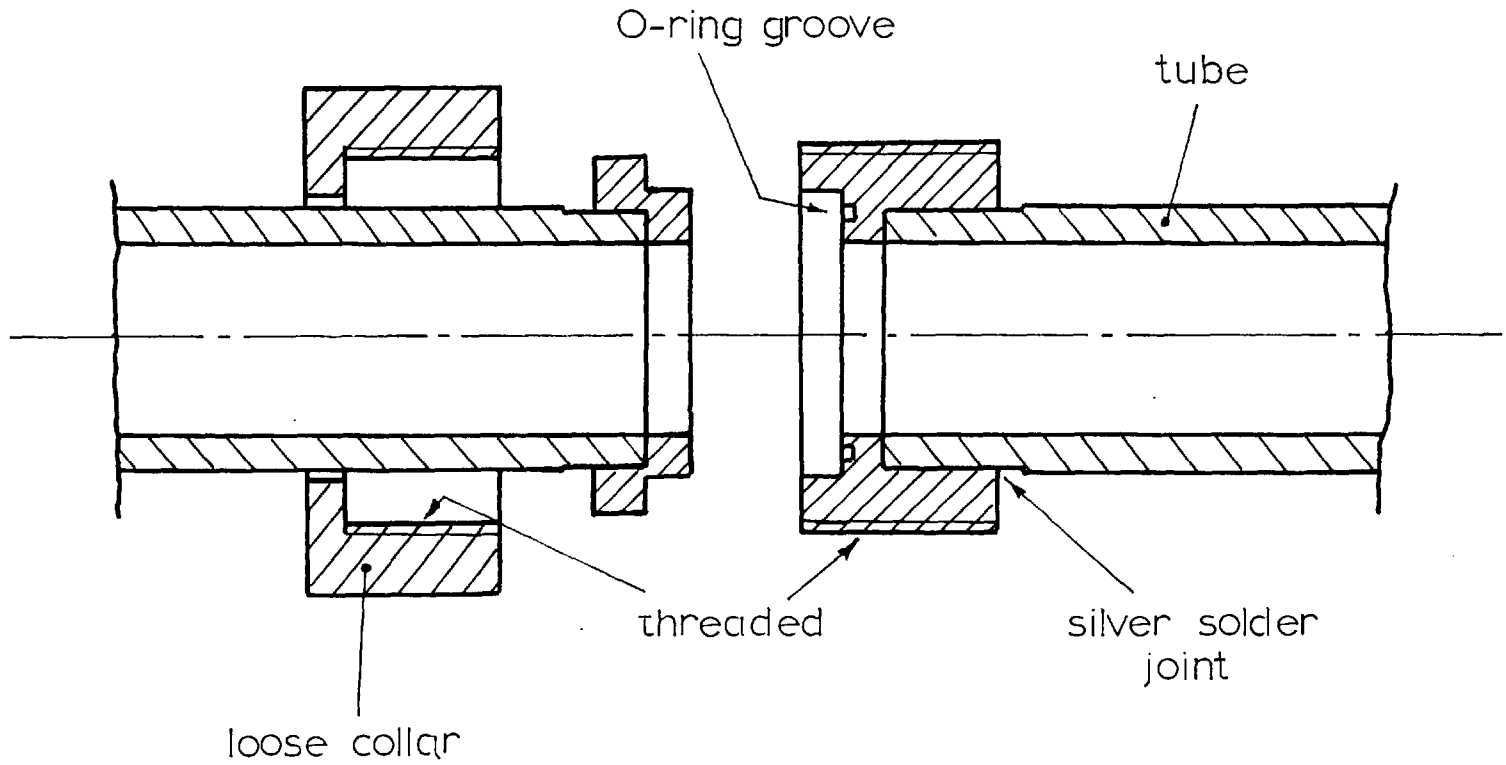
Vacuum tight tube connections. Drawn actual size.
